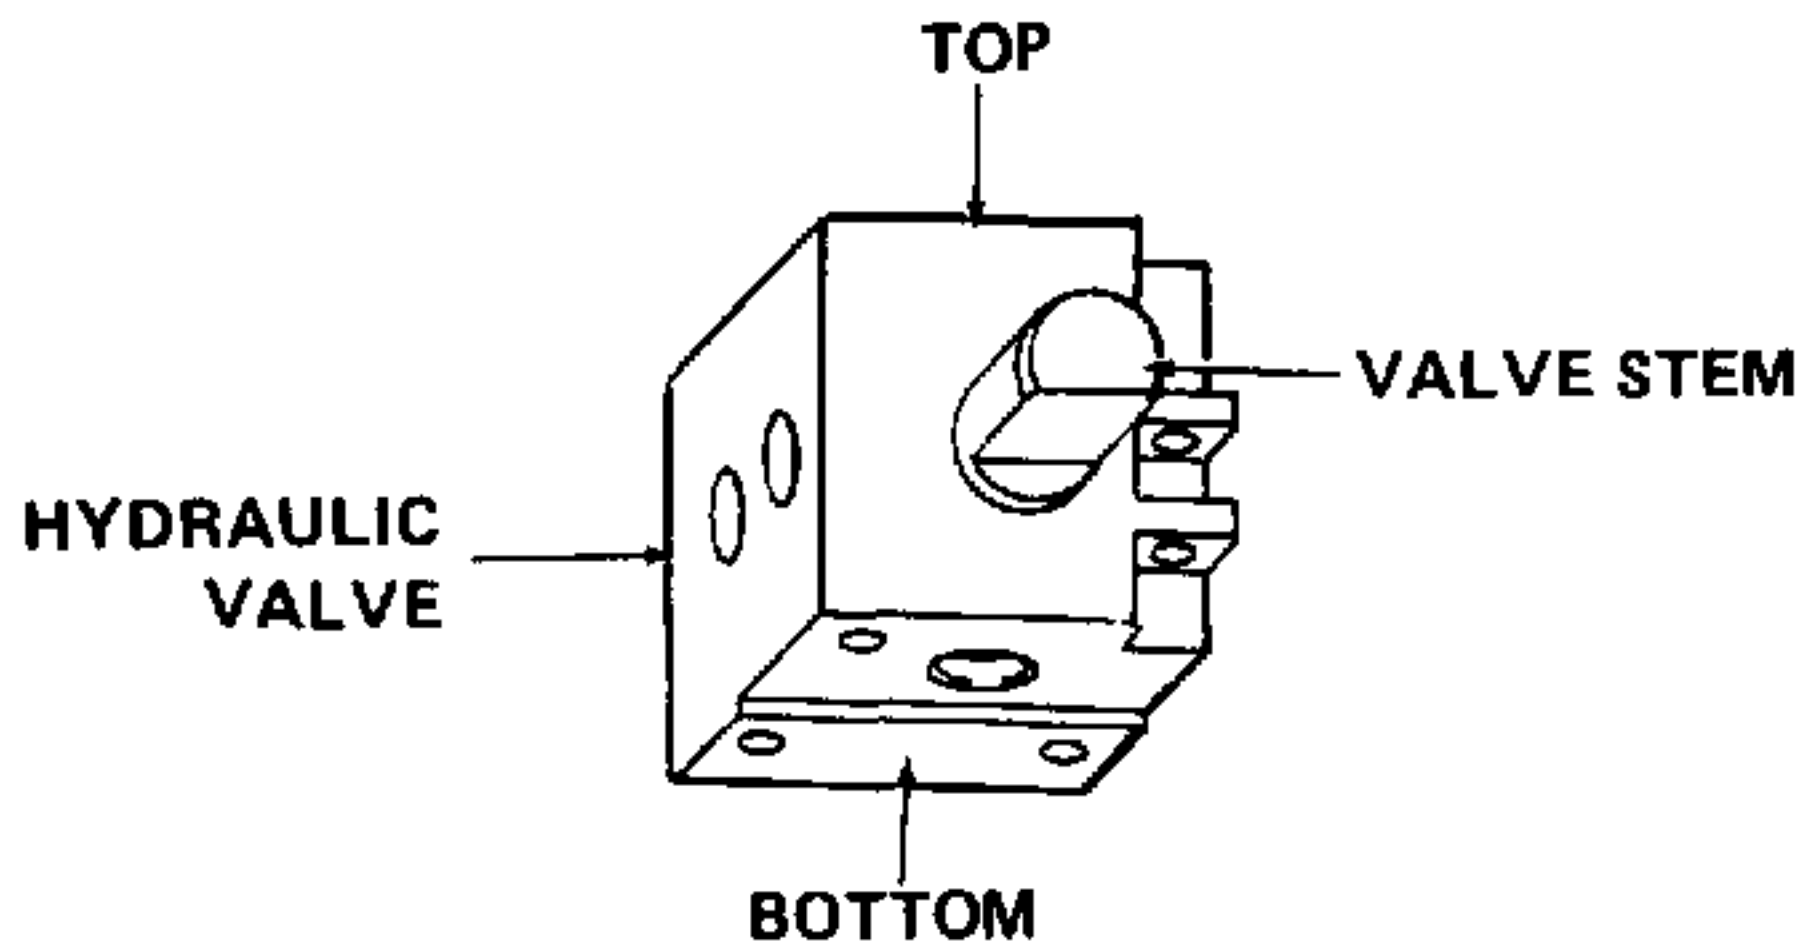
Turning the Valve Stem on the Hydraulic Valve.
